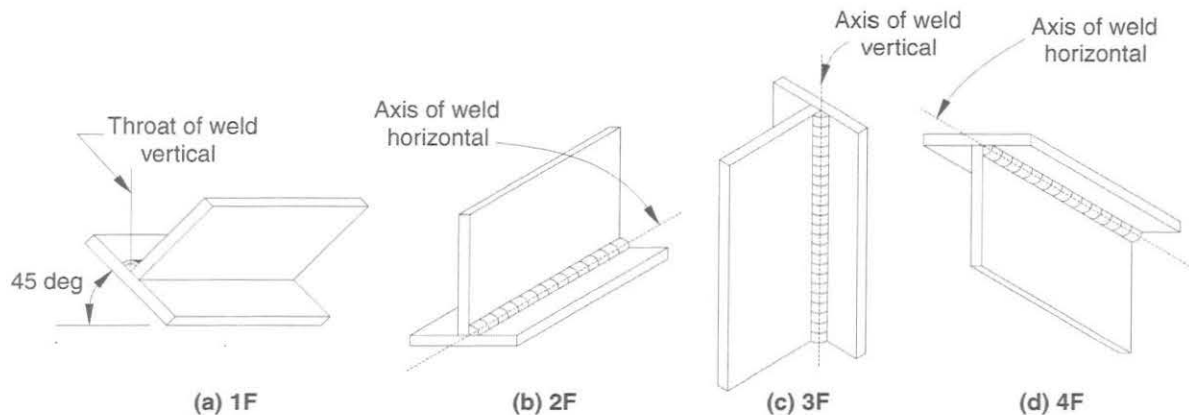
QW-461.5 Fillet welds in plate—test positions.
